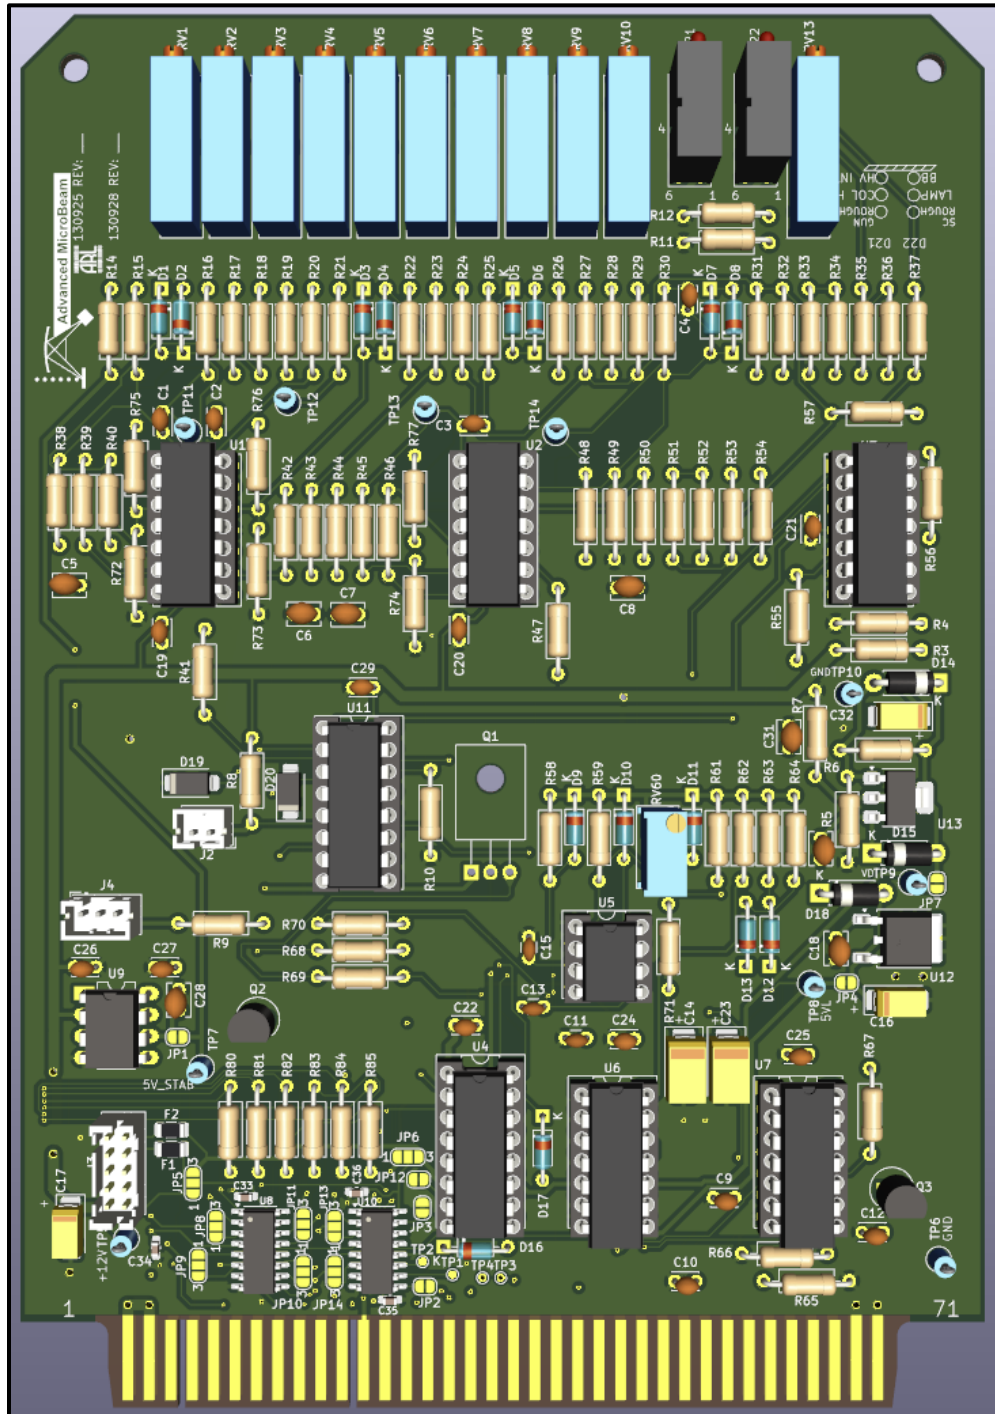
Custom Designed ARL-SEMView Vacuum Interlock Board
